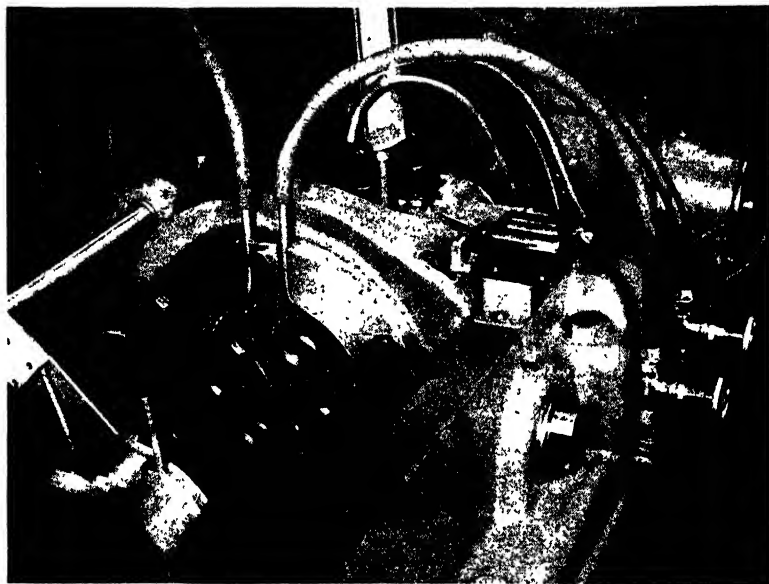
Injection Moulding, showing multiple mould for buttons.
